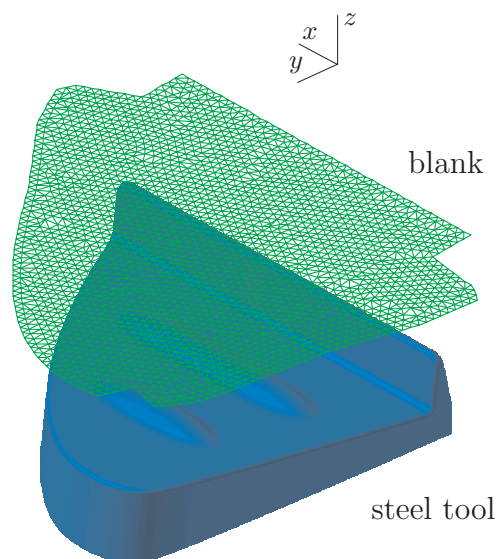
Wing leading edge rib set-up; the lower steel mould and the meshed pre-form. The upper rubber tool and the blank holder are not shown for clarity purposes.
